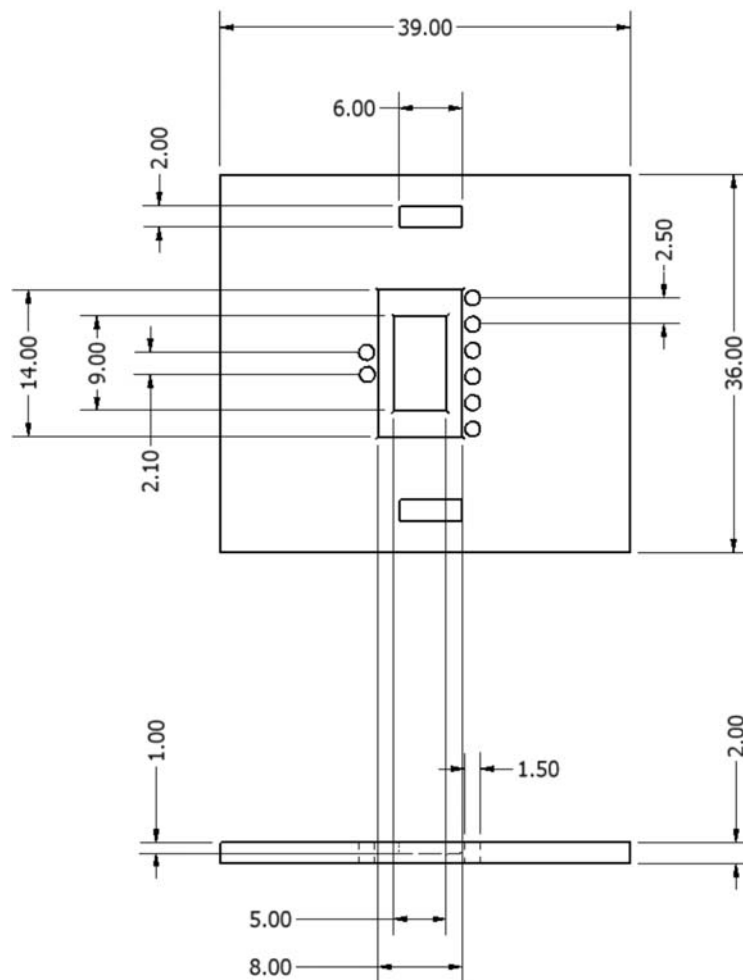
Engineering drawing with dimensions for the PMMA top plate.
